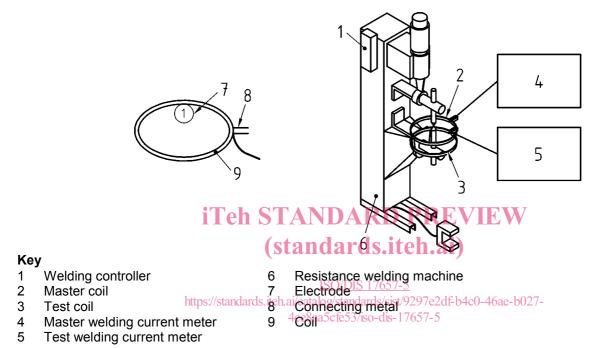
A typical set-up for verification of a welding current meter
